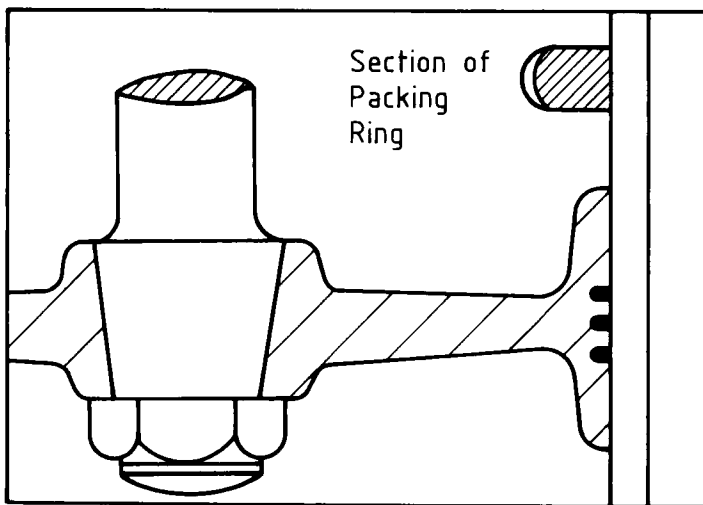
The Ramsbottom (1854) Steam Engine Piston Assembly
